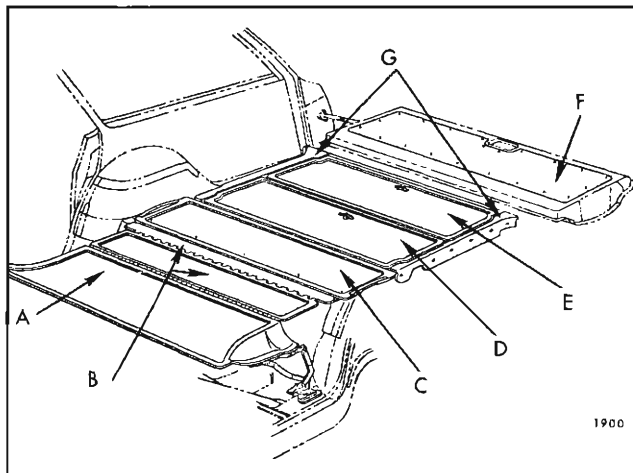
H26—Folding Seat and Floor Panels 15000 and 16000 "35" Styles
